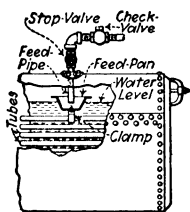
Top feed and spray pan in horizontal return-tubular boiler.
